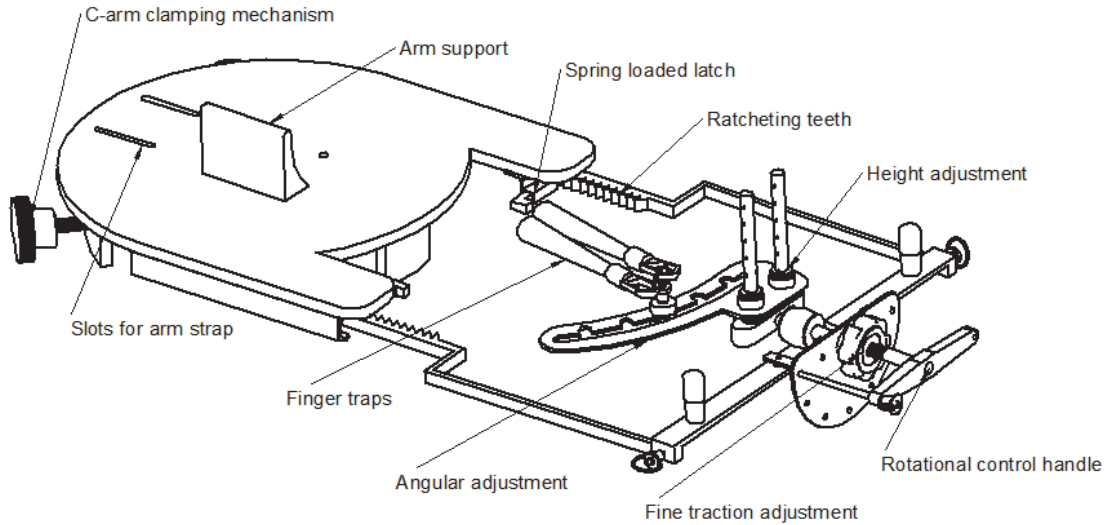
CAD drawing of traction device highlighting main sub-components
